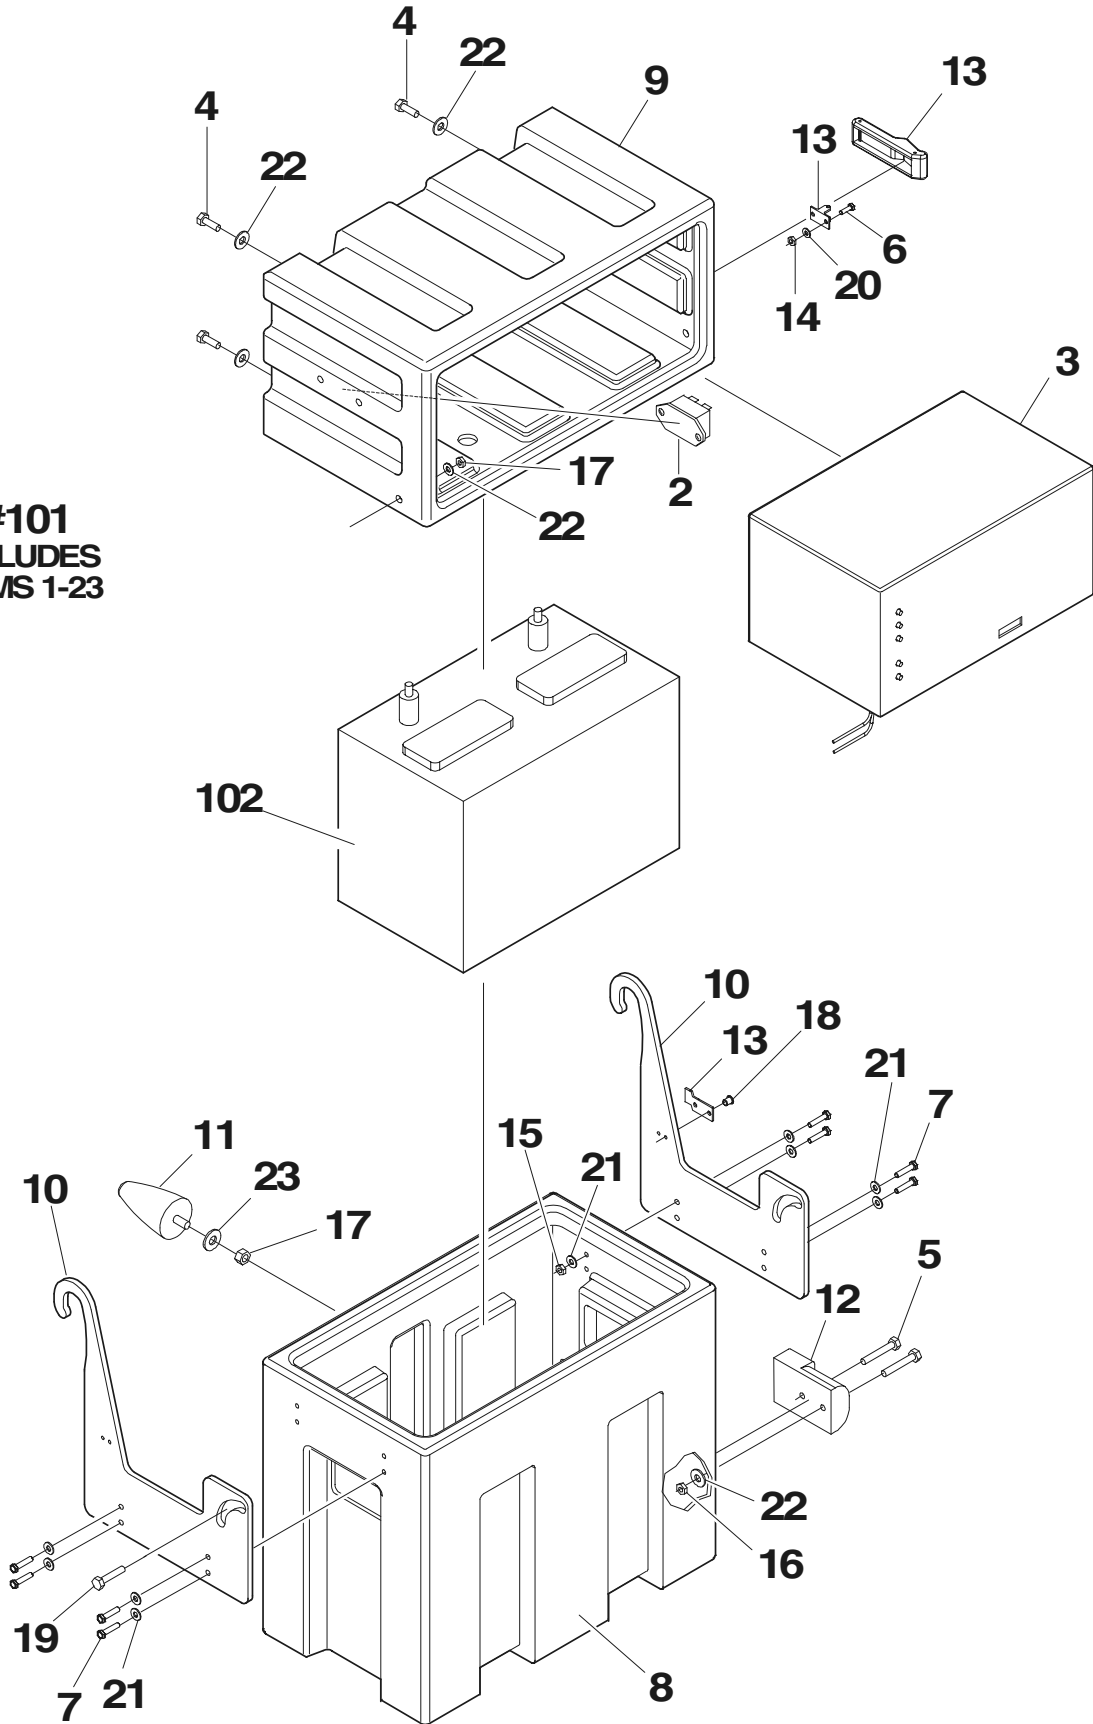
DC MOTOR/PUMP ASSEMBLY (CONTINUED)
